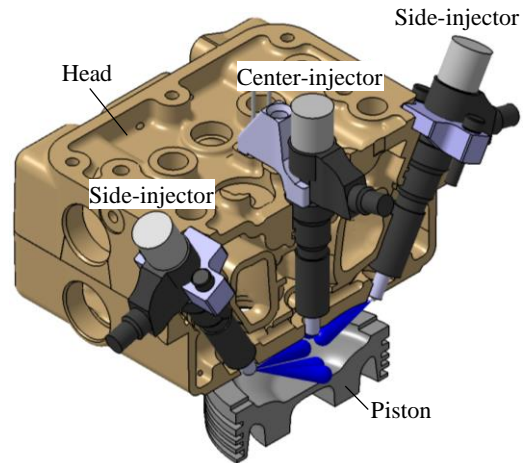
Piston cavity design, injector layout, and spray directions of side injectors
